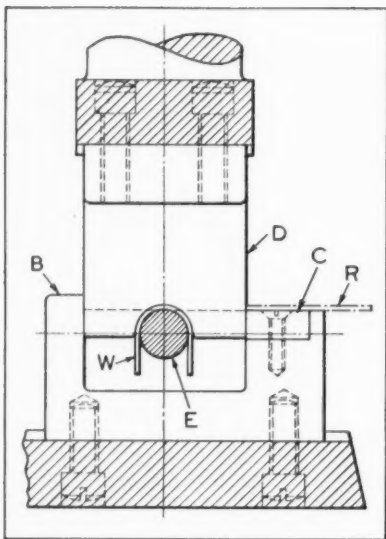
Section X-X, Fig. 1, Showing Cut-off Piece W Formed to a U-shape
